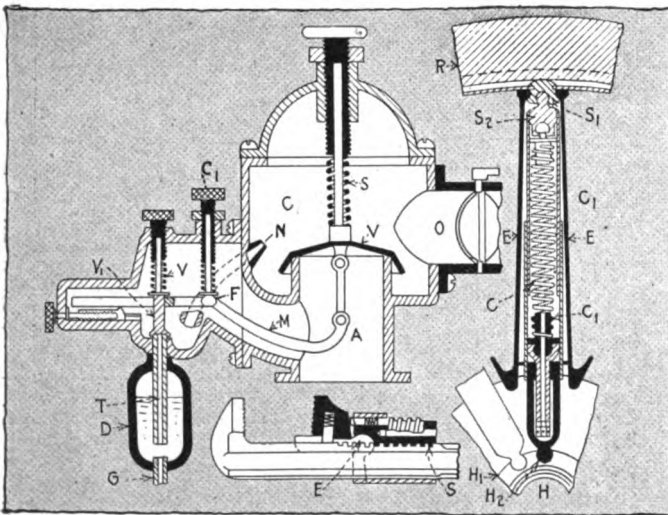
Watson positive-working carbureter. Fig. 2—Mossberg pipe-wrench design. Fig. 3—Wilkes automobile spring wheel
